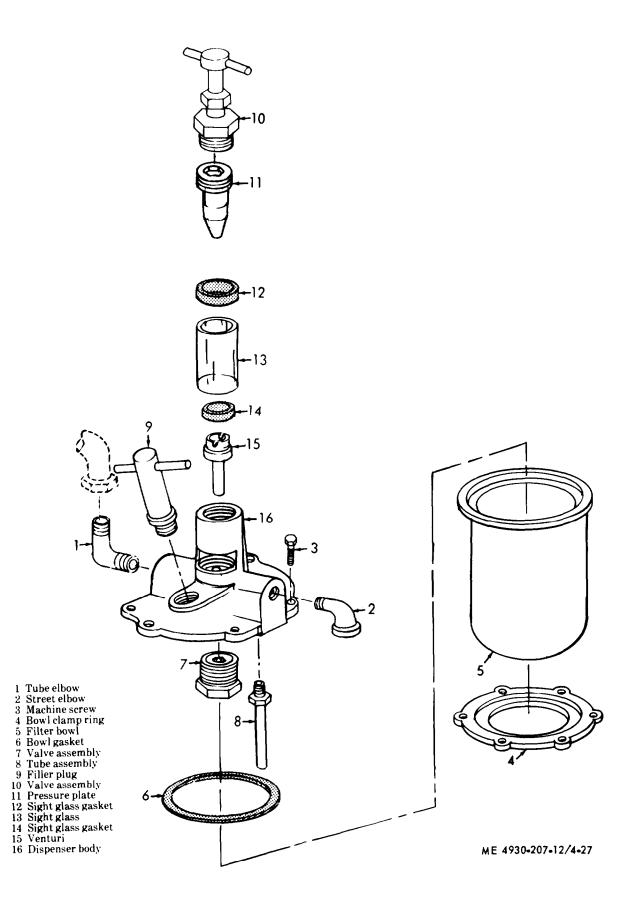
Alcohol dispener, disassembly and reassembly.
